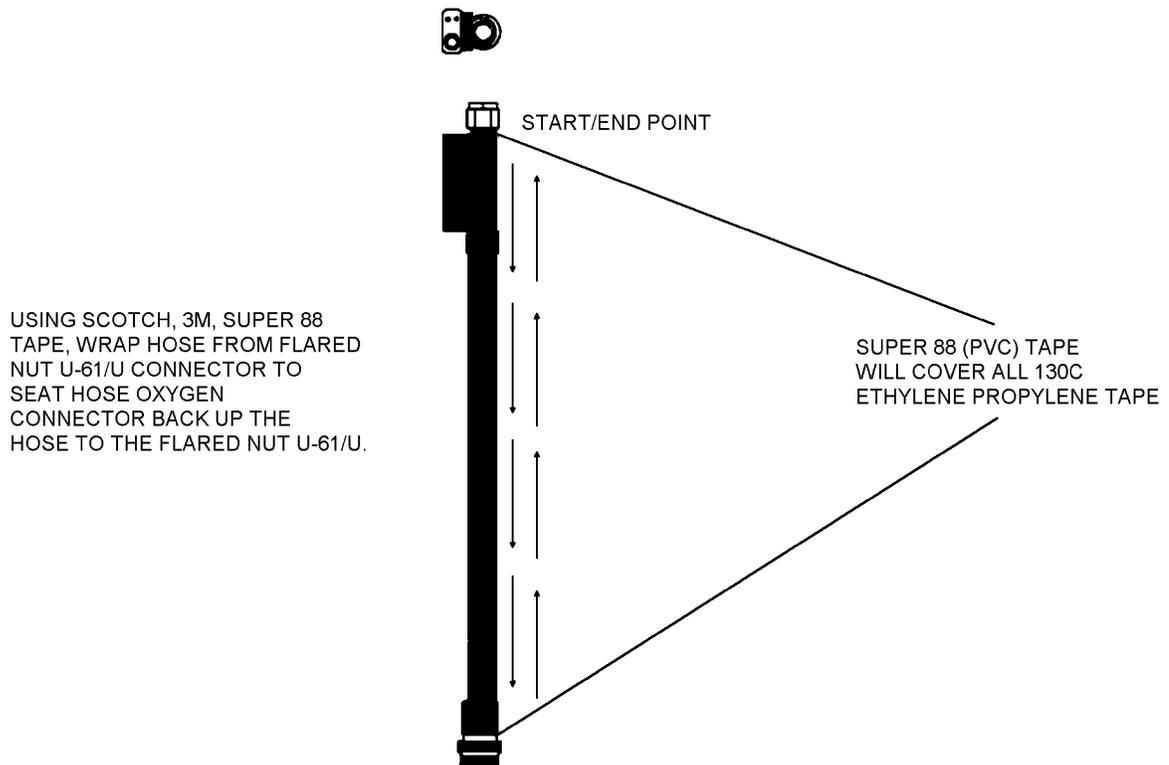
Regulator to Survival Kit Hose Assembly Taping
